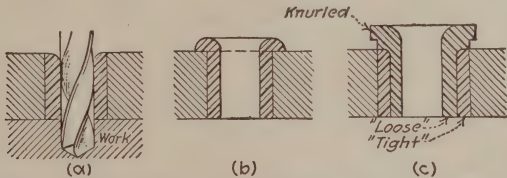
Types of jig bushings. (a) Flush bushing, (b) Flanged bushing, (c) Slip bushing.
